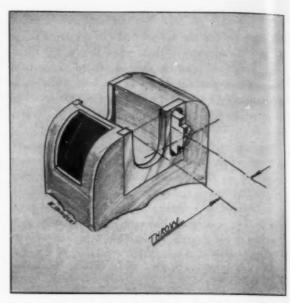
Detail of locating pin on left head that accurately locates and guides the crank cheek in proper relation to the crank throw during assembly.
